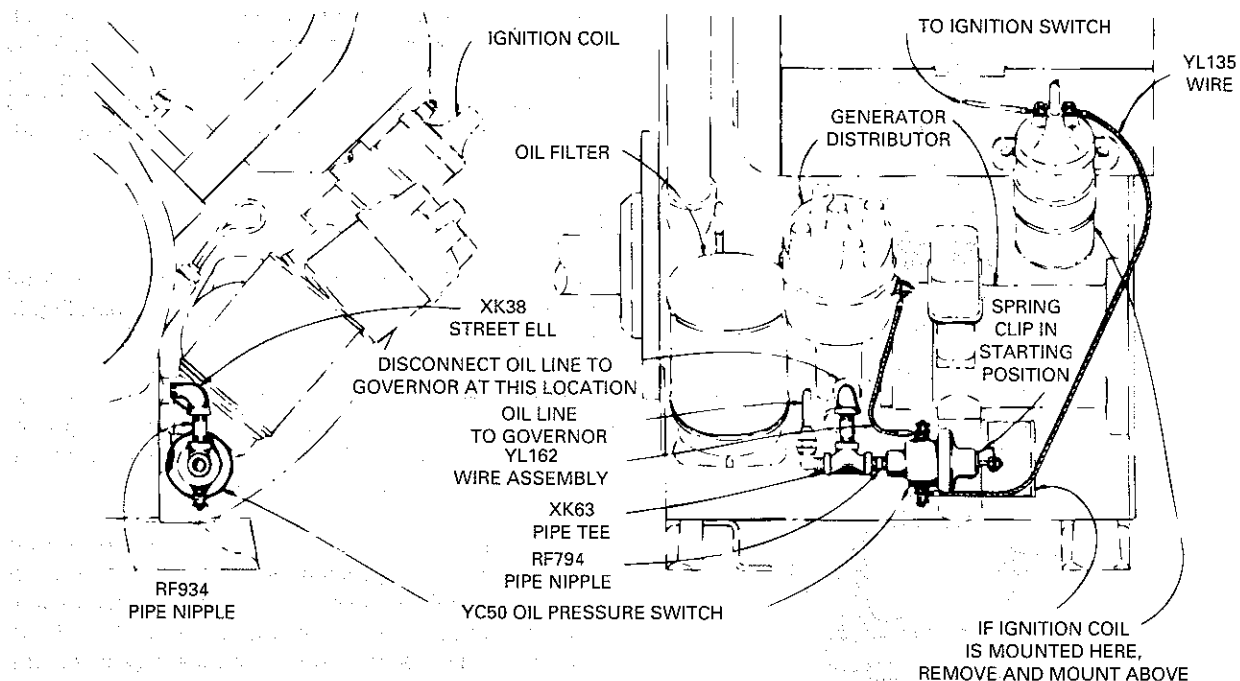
Oil pressure switch mounting, with battery ignition, distributor
